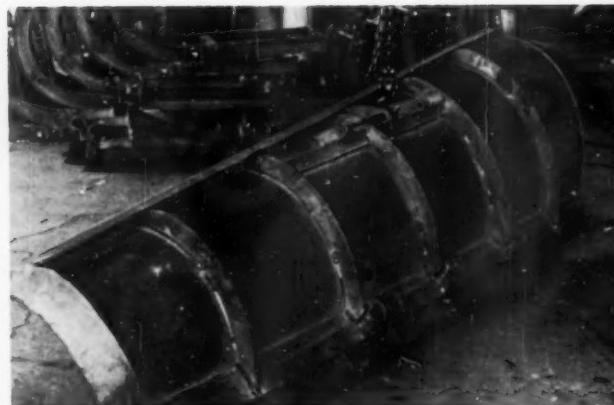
Completed mold board. Fillet welds are made in one pass in low carbon steel.
